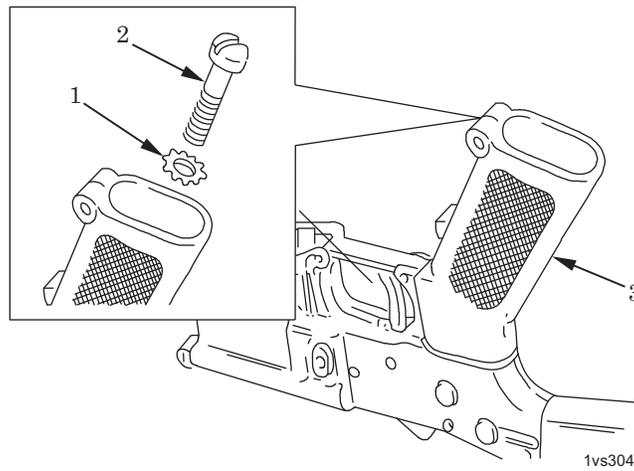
Securing Pistol Grip with Lock Plate Removed.
